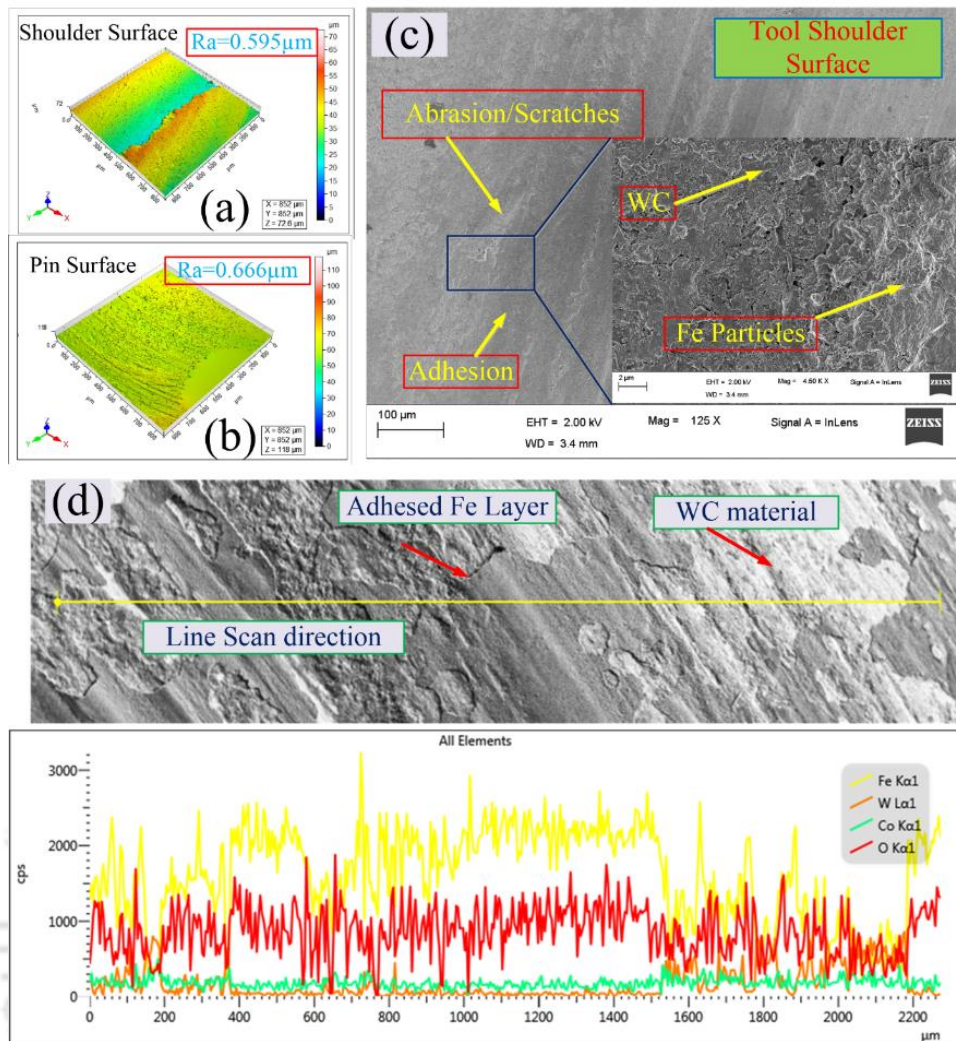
Tool wear characterization: (a) surface roughness at the tool shoulder, (b) surface roughness at the tool pin, (c) FESEM micrograph at the tool shoulder indicating scratches and Fe adhesion, (d) FESEM micrograph indication Fe adhesion and abrasion, and (e) EDS analysis reflecting higher peaks of Fe on tool shoulder surface
